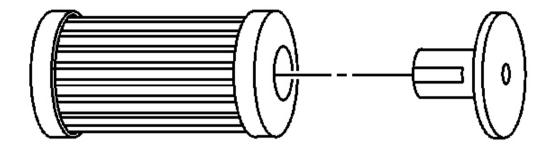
Removing Check Valve Courtesy of GENERAL MOTORS CORP.
